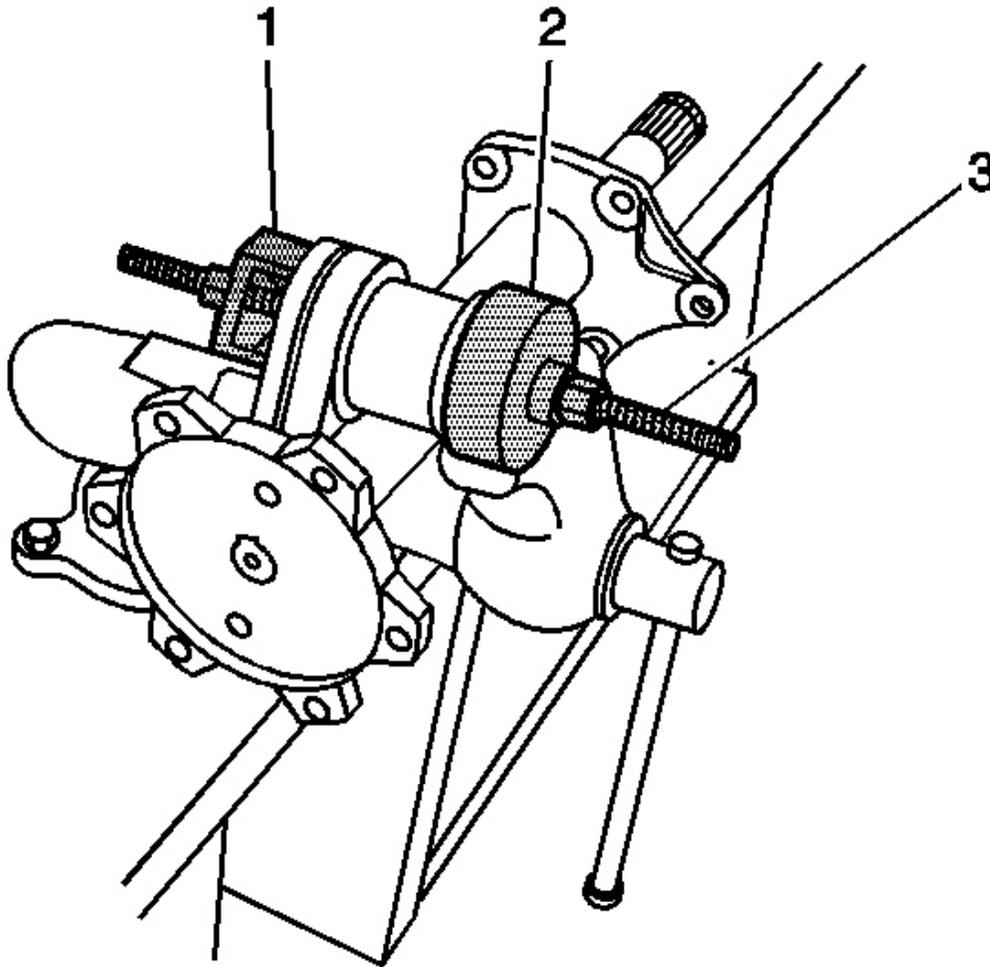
Installing J 45755-2, J 45755-1, Forcing Screw, Bearing & Washers Inner Shaft Housing Bushing
